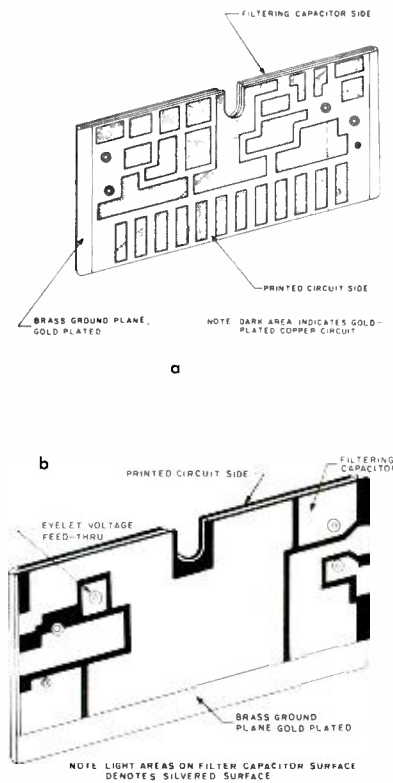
Details of wafer for test subsystem; a) printed circuit side; b) filter capacitor side.
